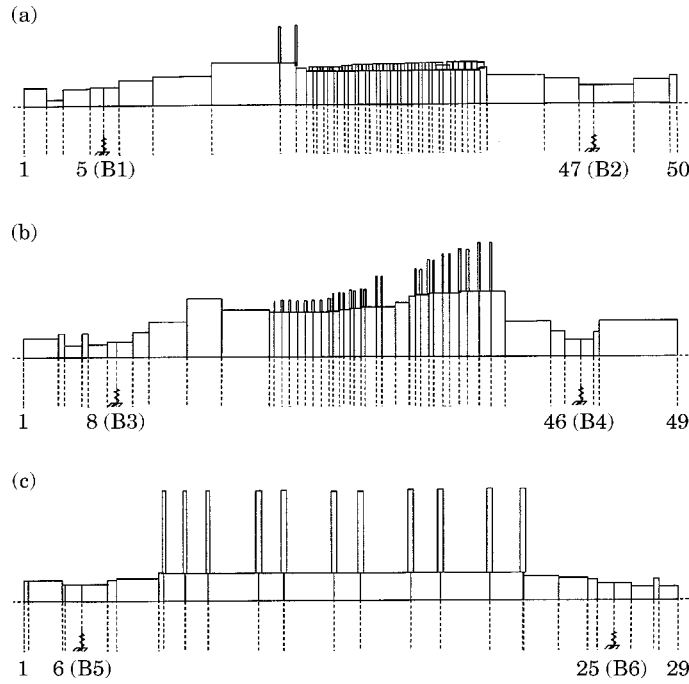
Finite element model of the turbine-blower assembly. (a) High pressure turbine, (b) low pressure turbine, (c) blower.
